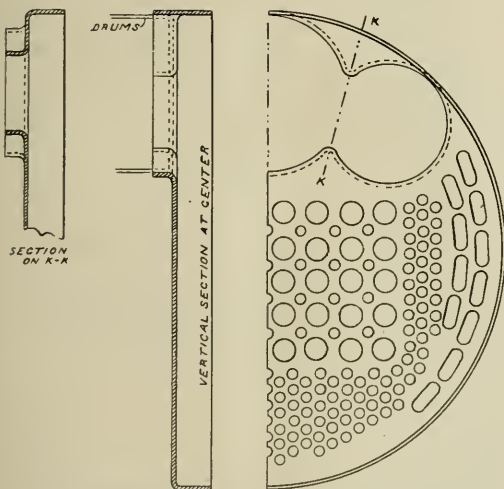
Back Tubesheet of McClellon Water Tube Boiler
